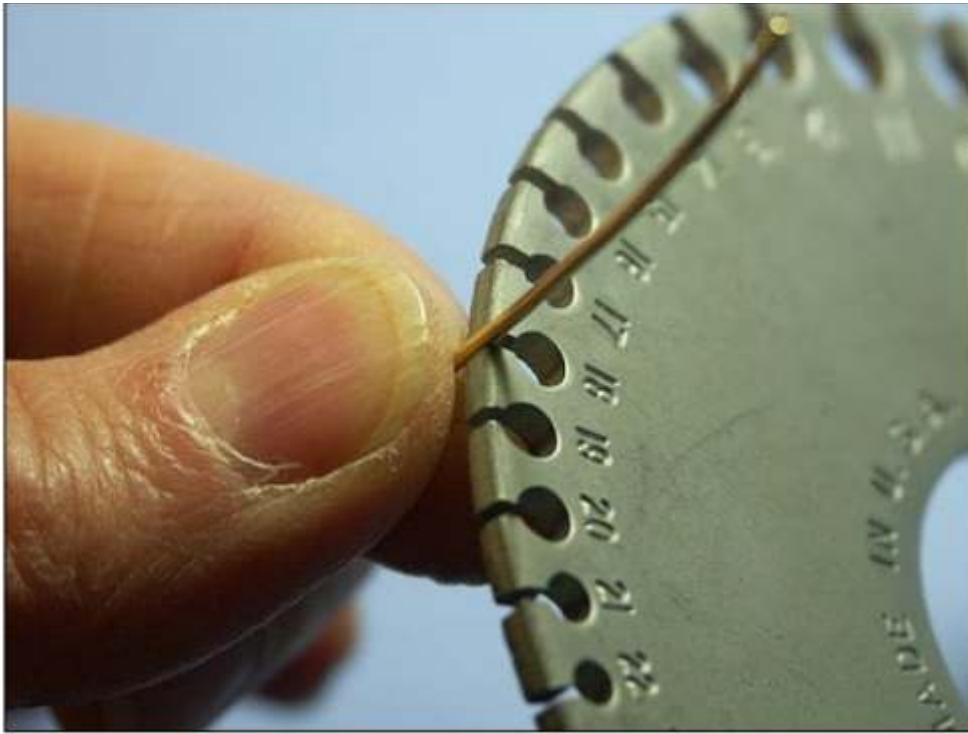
Wire drawing – Check the wire size with a wire gauge
